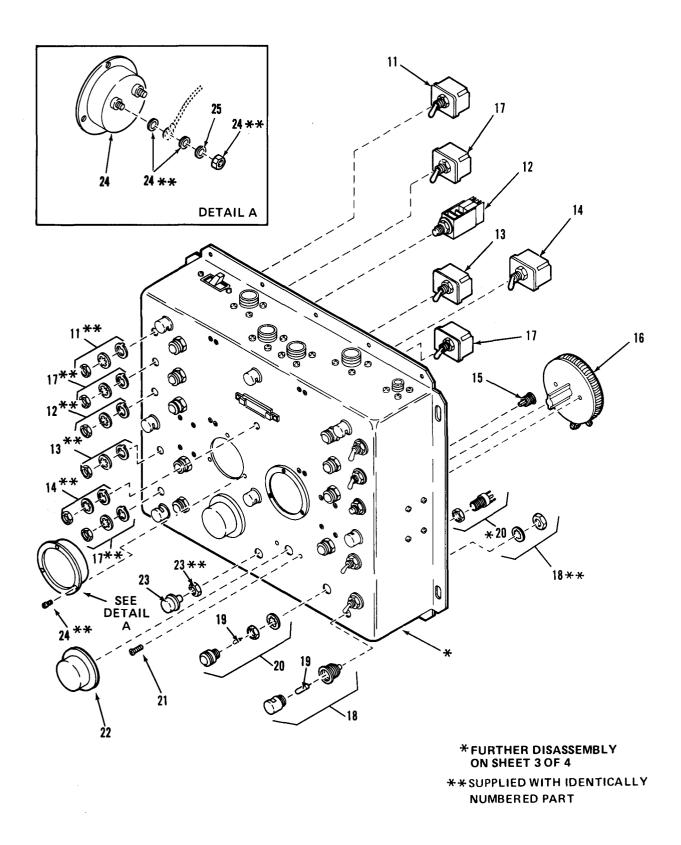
Control Panel Assembly Panel Cover (Sheet 2 of 4)
